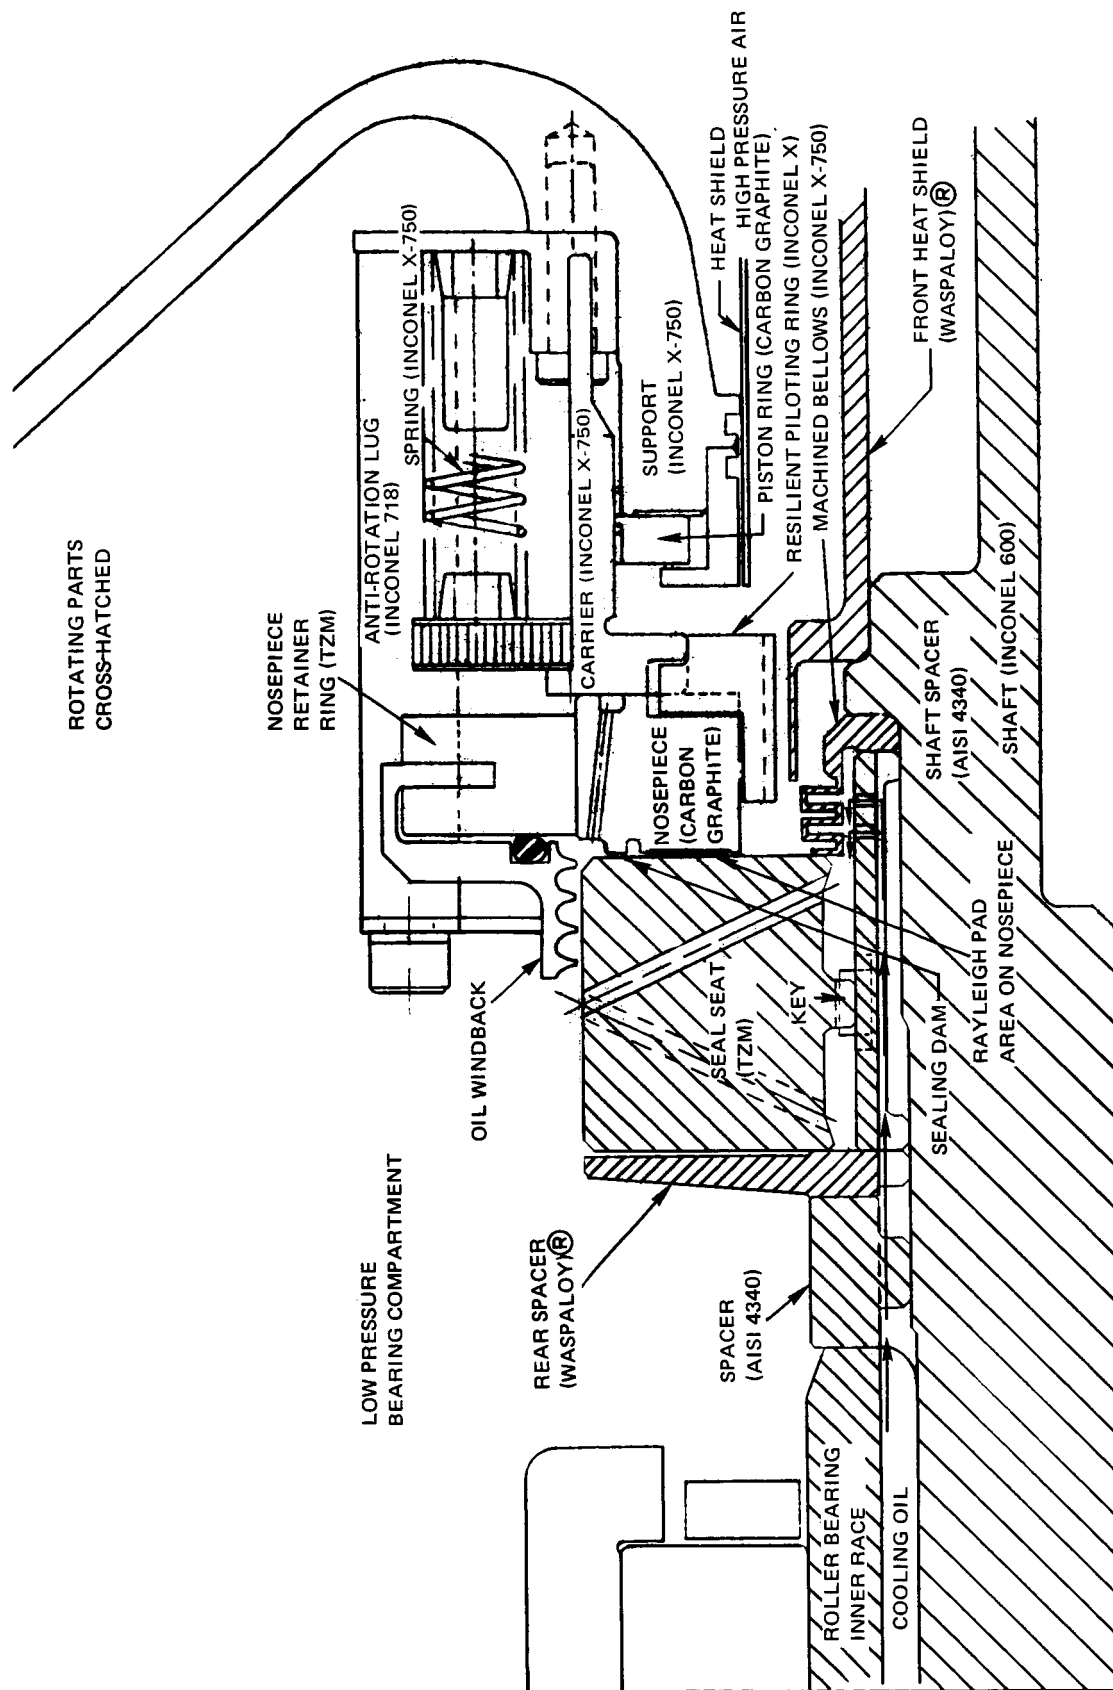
Hub and Seal Assembly the Same as Figure 29 Except for Alternate Two-Piece Seal Seat Spacer
